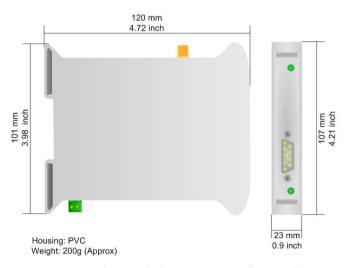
Mechanical dimensions scheme for HD67300-001-A5
